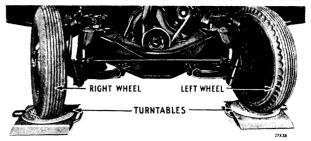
Checking Toe-Out on Turns (Tool DD-435)
